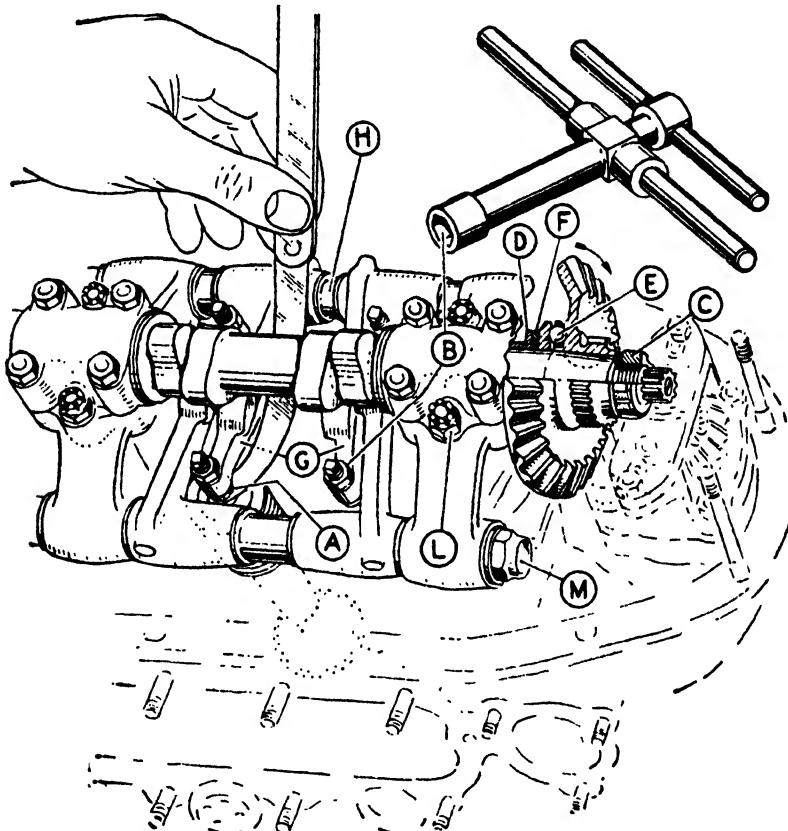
View of Rockers and Camshaft showing Tappet Adjustment.
